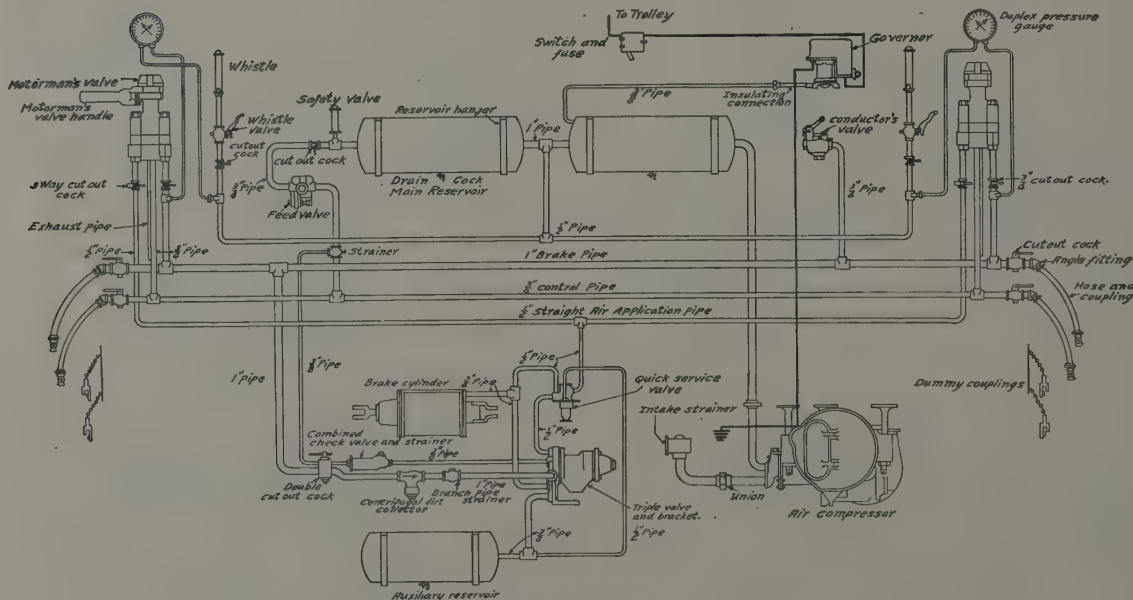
Combined Straight and Automatic Variable Release Air Brake Equipment for Motor Car. General Electric Company.
